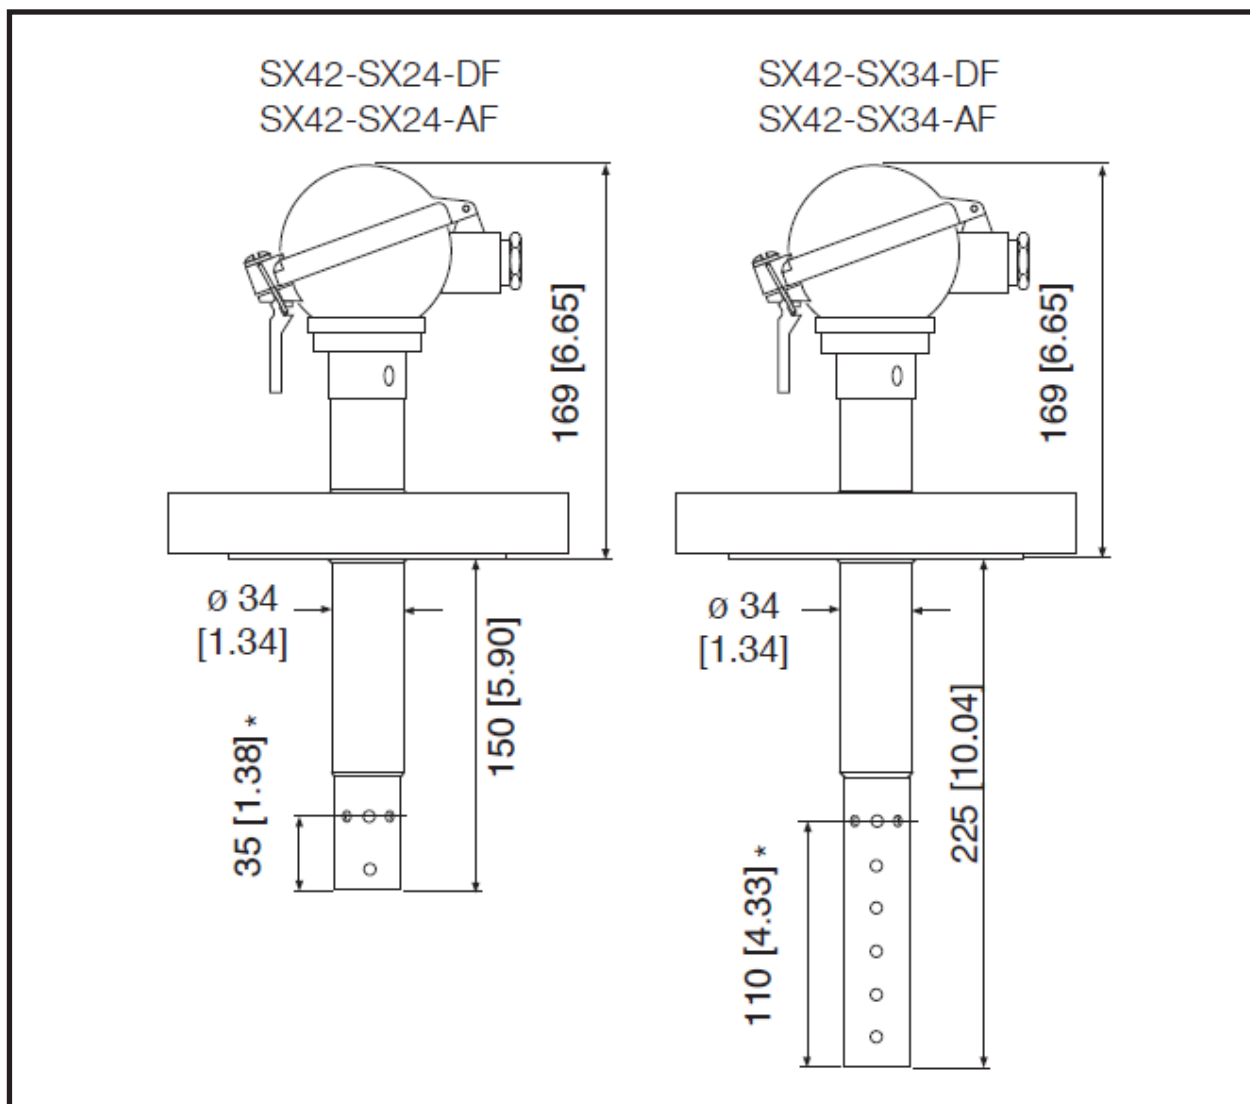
Dimensions SX42 flanged models - dimensions in mm [inches]
